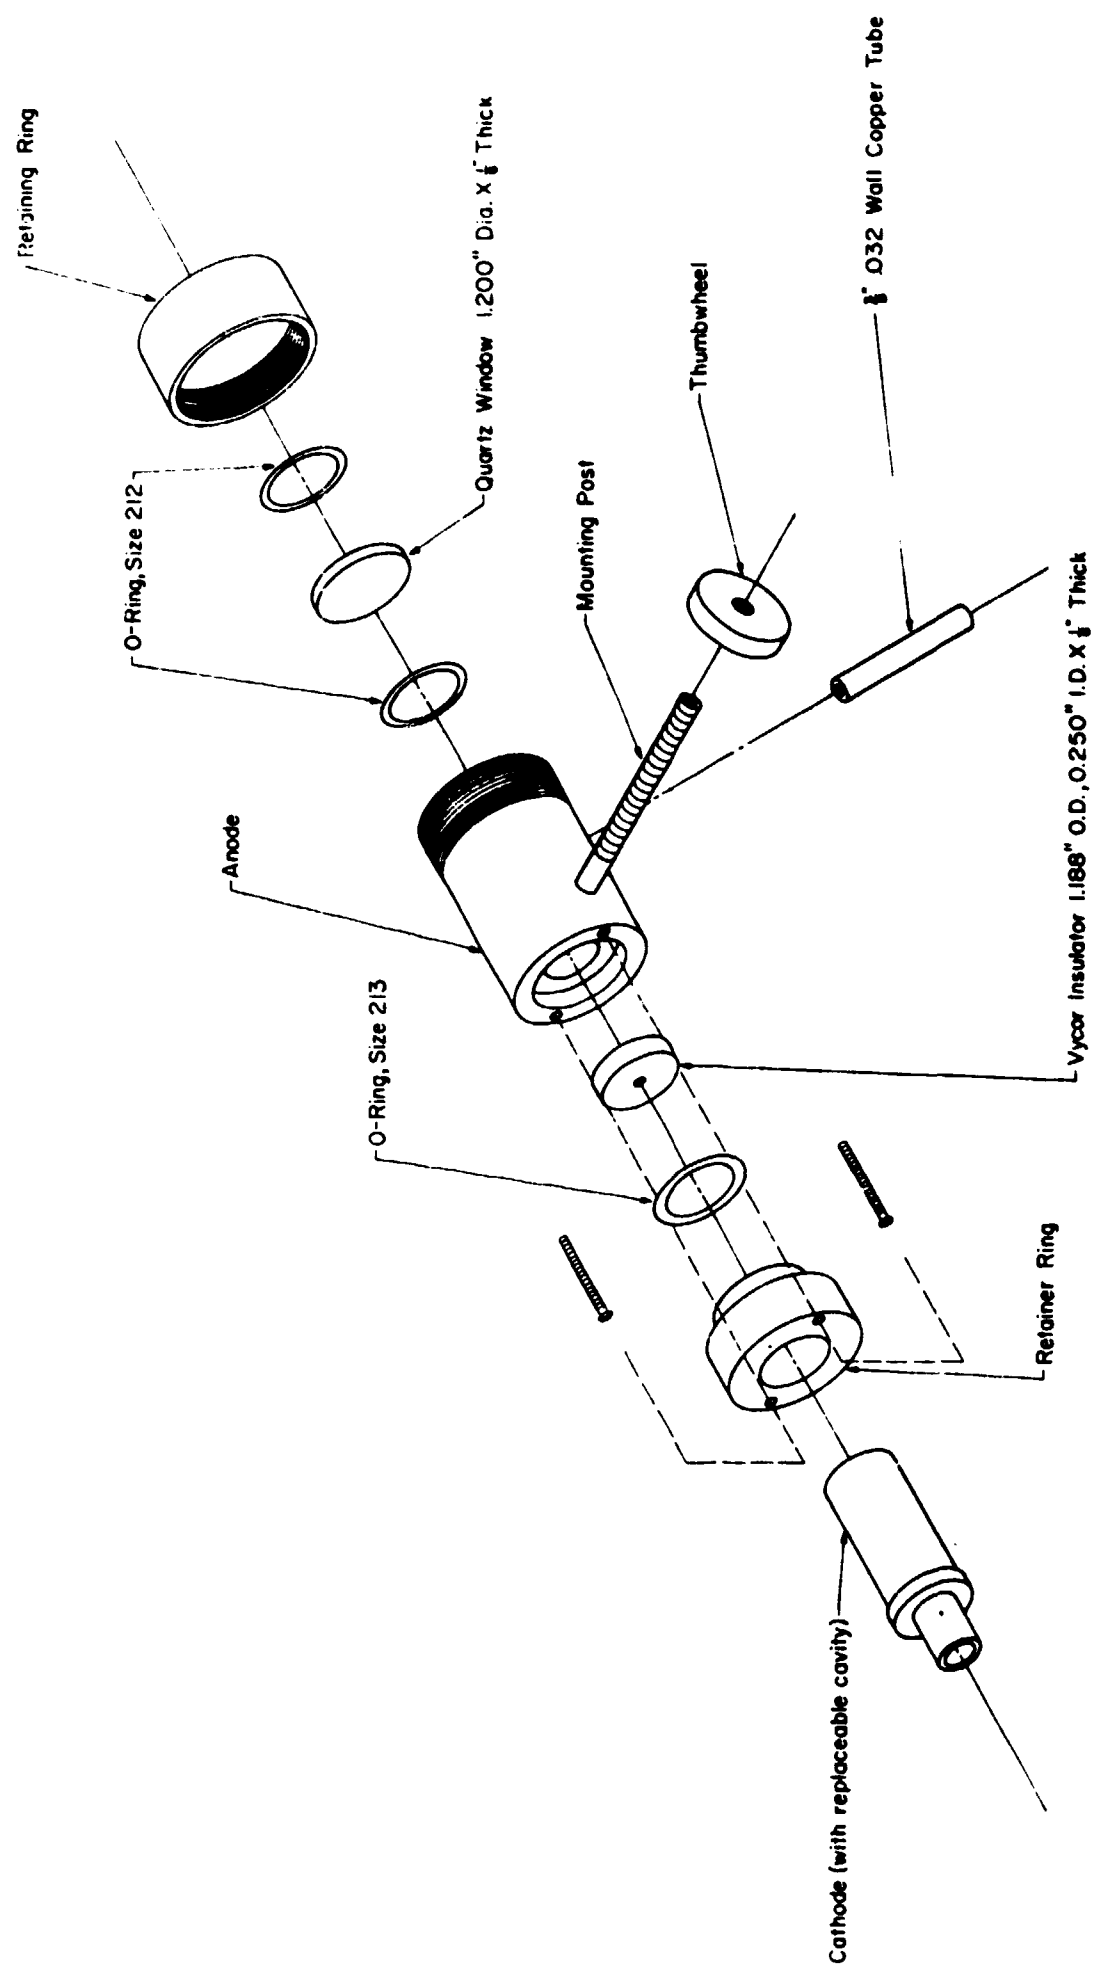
EXPLODED VIEW OF LIGHT SOURCE
